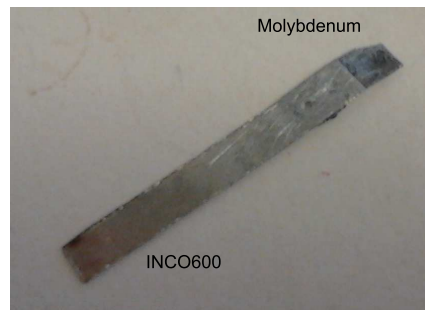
Spot welded Inco600 on Mo-electrode.
